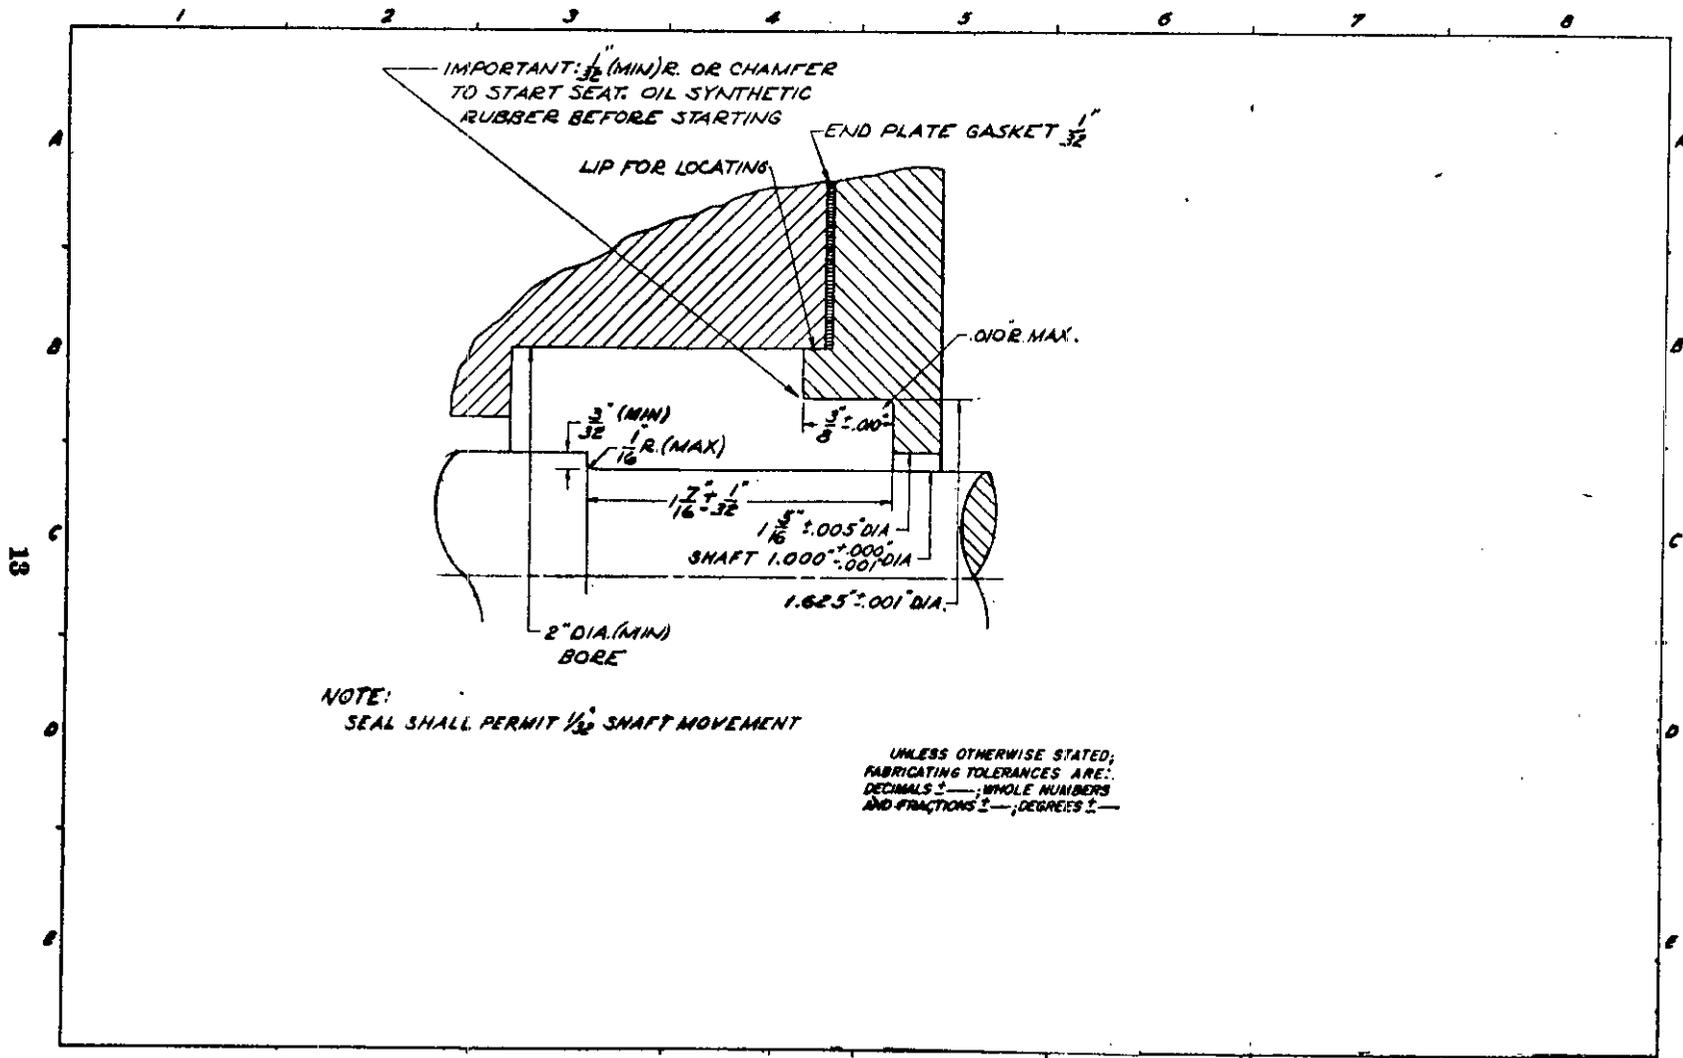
Compressor, reciprocating power-driven, open type, for use with refrigerant 12, shaft seal housing.
